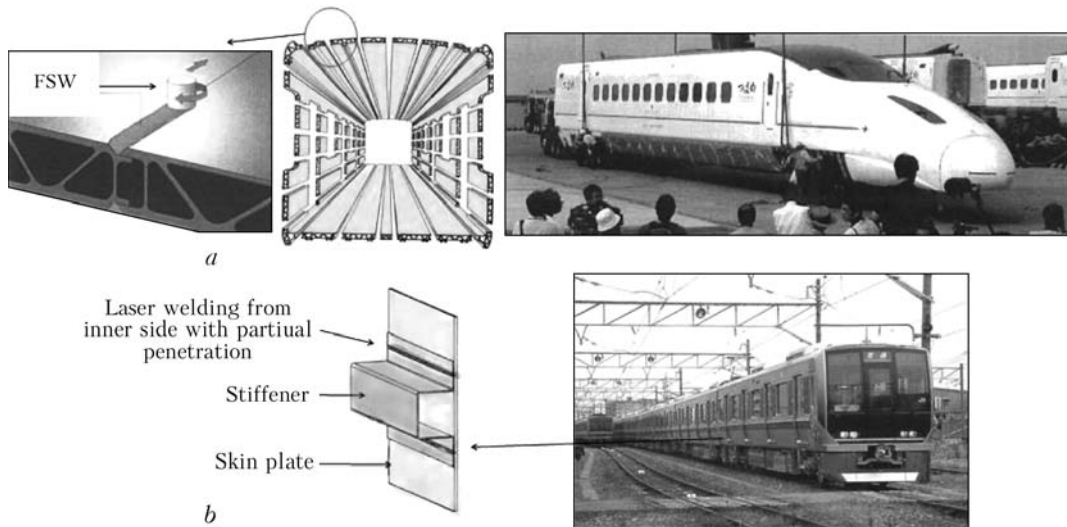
Employment of FSW to the «shin-kan-sen», Japanese bullet train, and laser welding to railway vehicles: *a* — FSW of double skin body extruded aluminum rods of Kyusyu «shin-kan-sen»; *b* — laser welding of 321 series stainless steel for alternating current electric commute train of West Japan Railway Company
